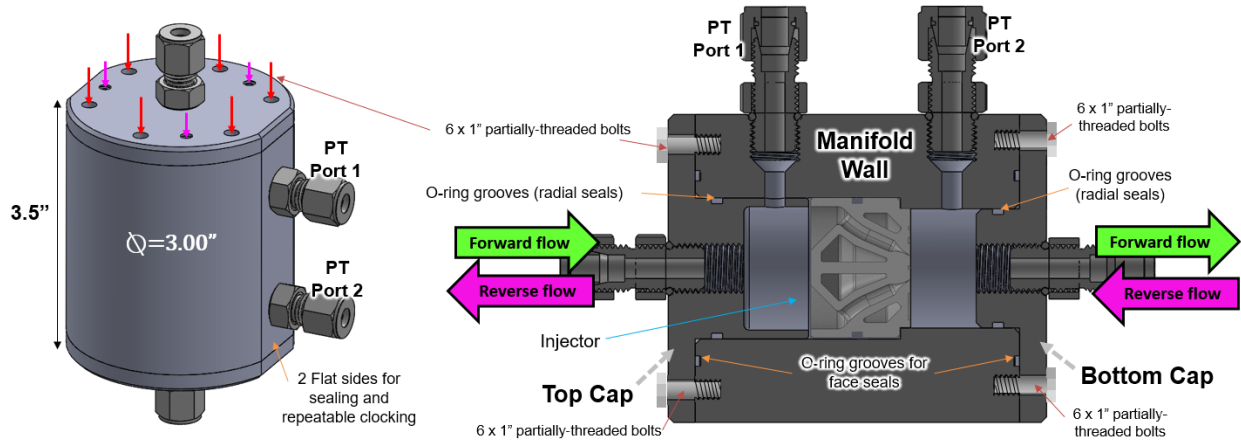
(Left) Isometric view of the cold-flow housing assembly used for the subscale AM injectors. (Right) Cross-section of cold-flow housing assembly CAD with AM tapered injector seated within housing.
